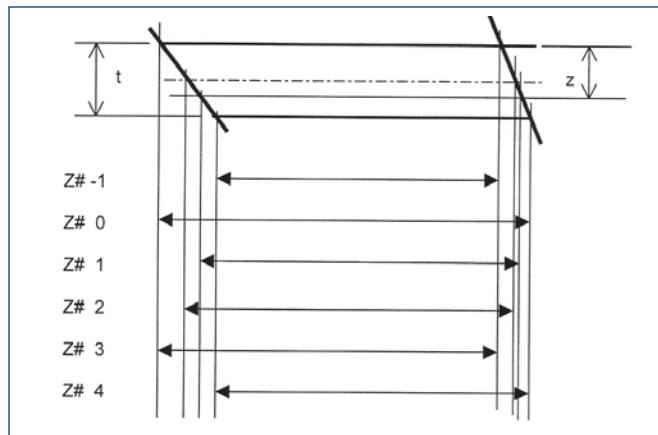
Common methods for dimensioning flat plates with dihedral cuts.
